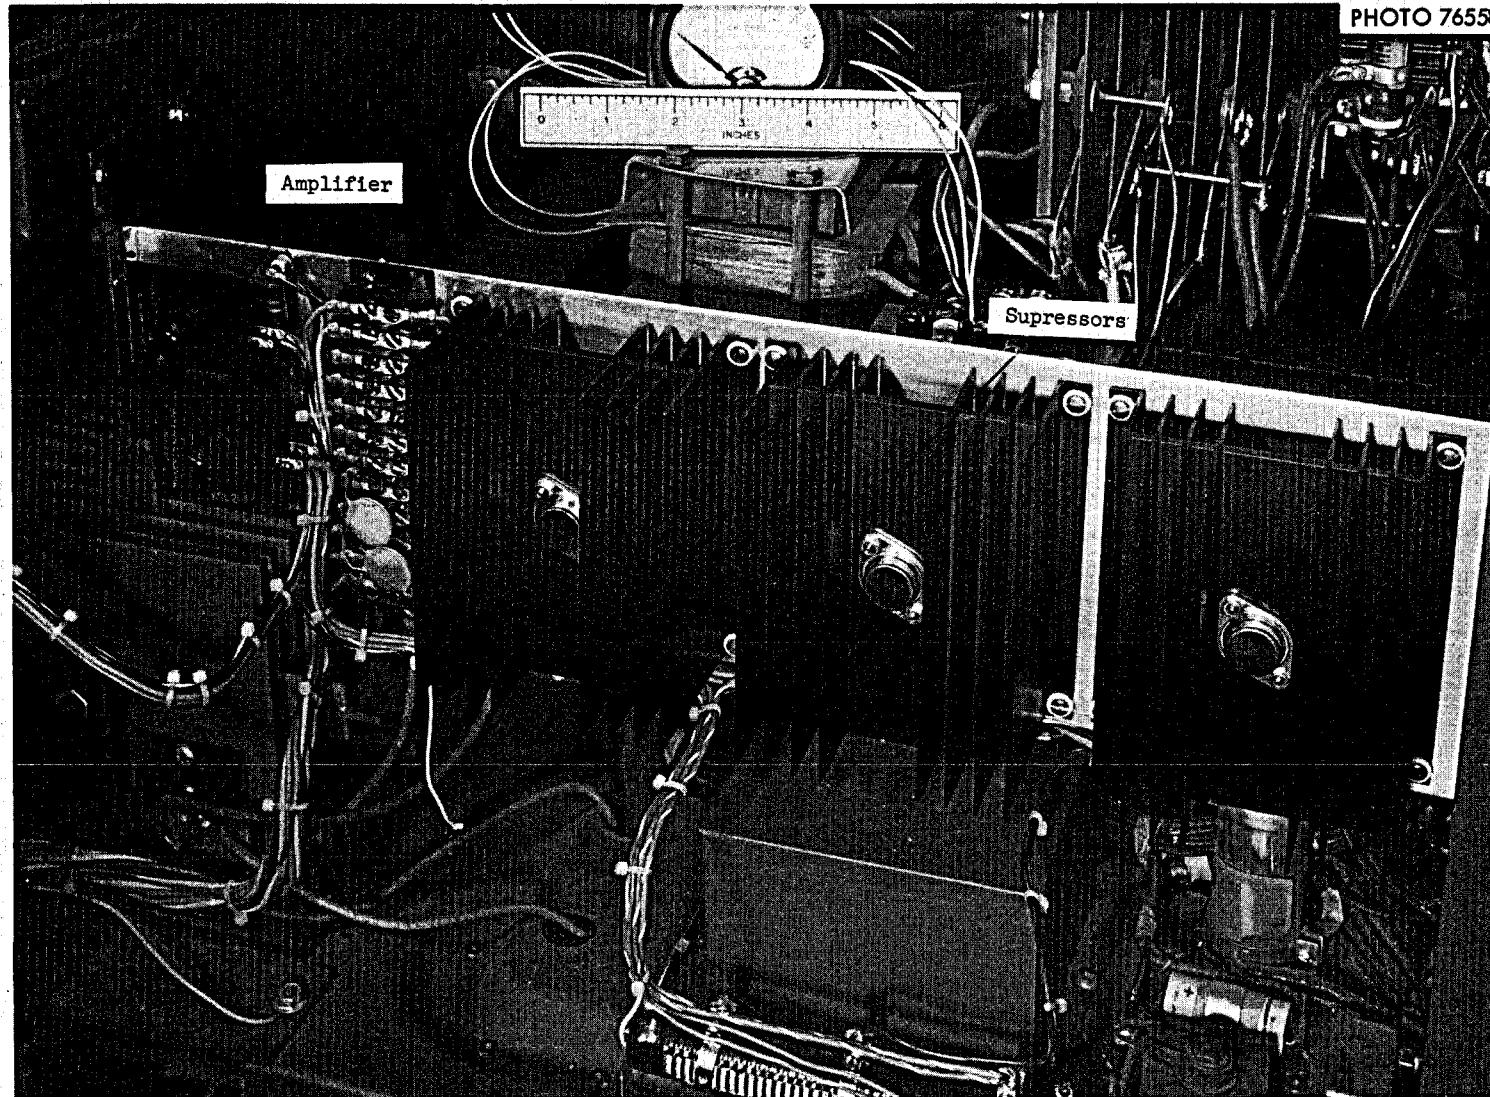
Modifications to Welding Machine Circuits.
